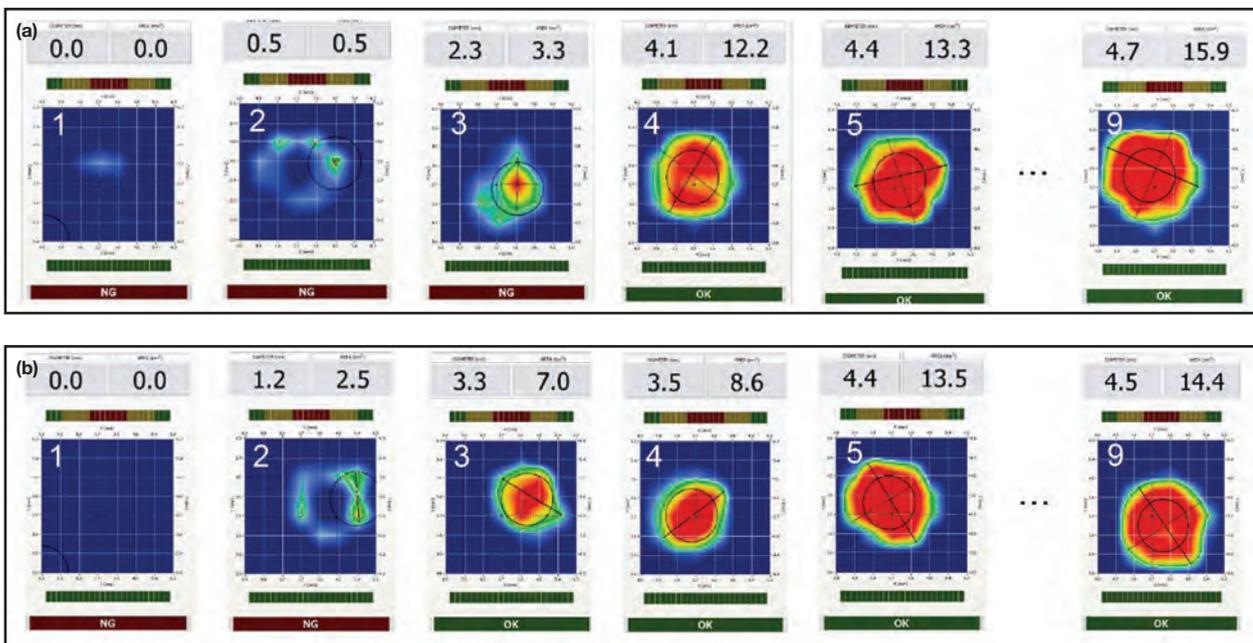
Ultrasonic images of spot weld nuggets for the test sample plate shown in Fig. 3. Welds in the upper row (a), welds in the lower row (b).
